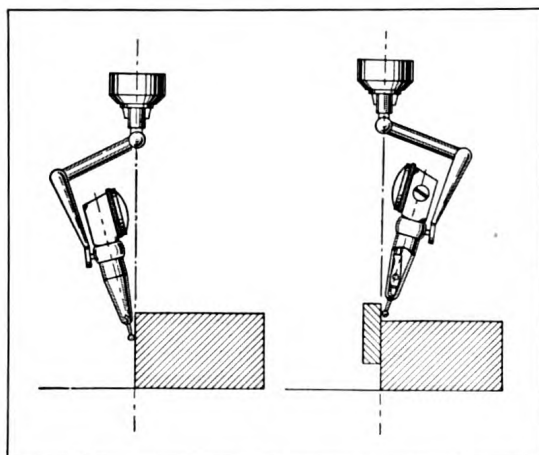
Picking up edge without edge-finder. Indicator is set against edge of workpiece, raised and rotated 180° to touch gage block held against edge.
